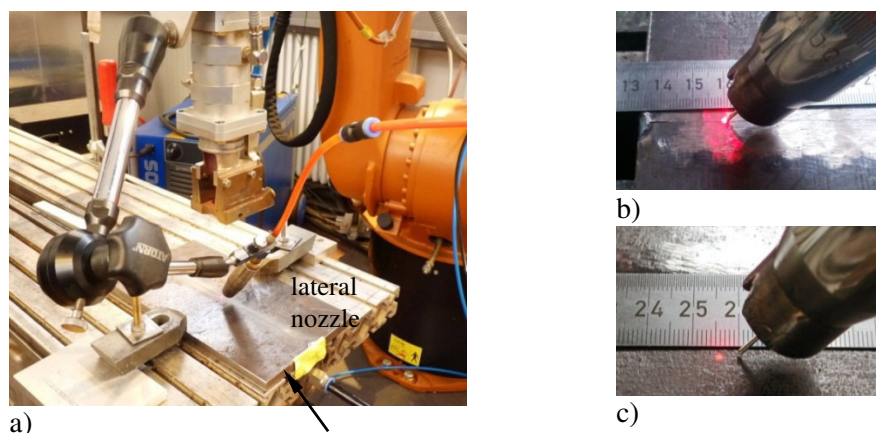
Welding process arrangements; laser welding (a); laser cold wire welding (b); hybrid laser-arc welding (c)
